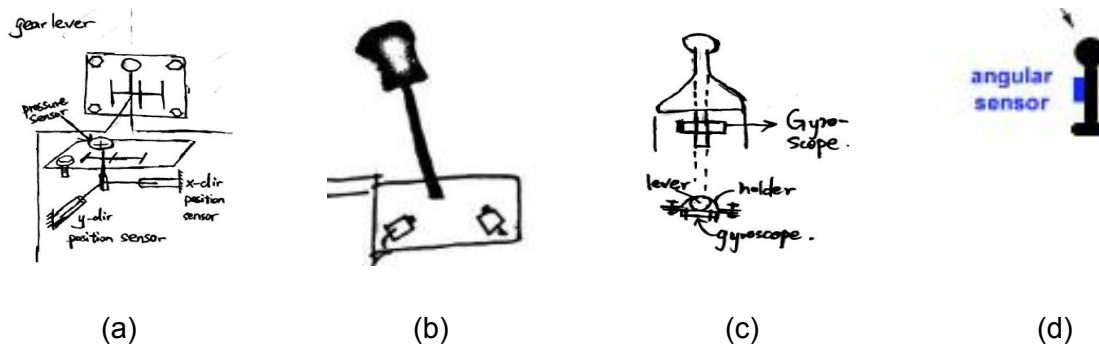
Sensor assembled at the gear lever. (a) Resistance-type displacement sensor; (b) Photoelectric sensor; (c) Gyroscope; (d) Angular sensor
